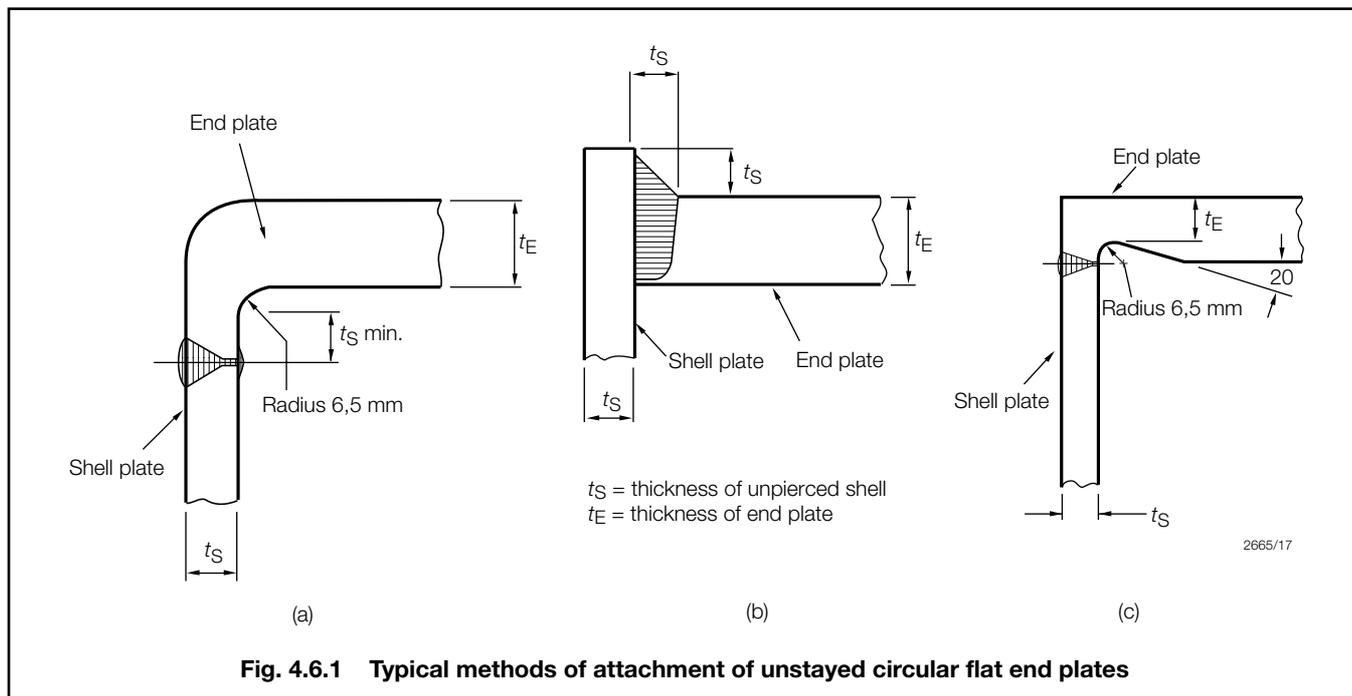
Typical methods of attachment of unstayed circular flat end plates
